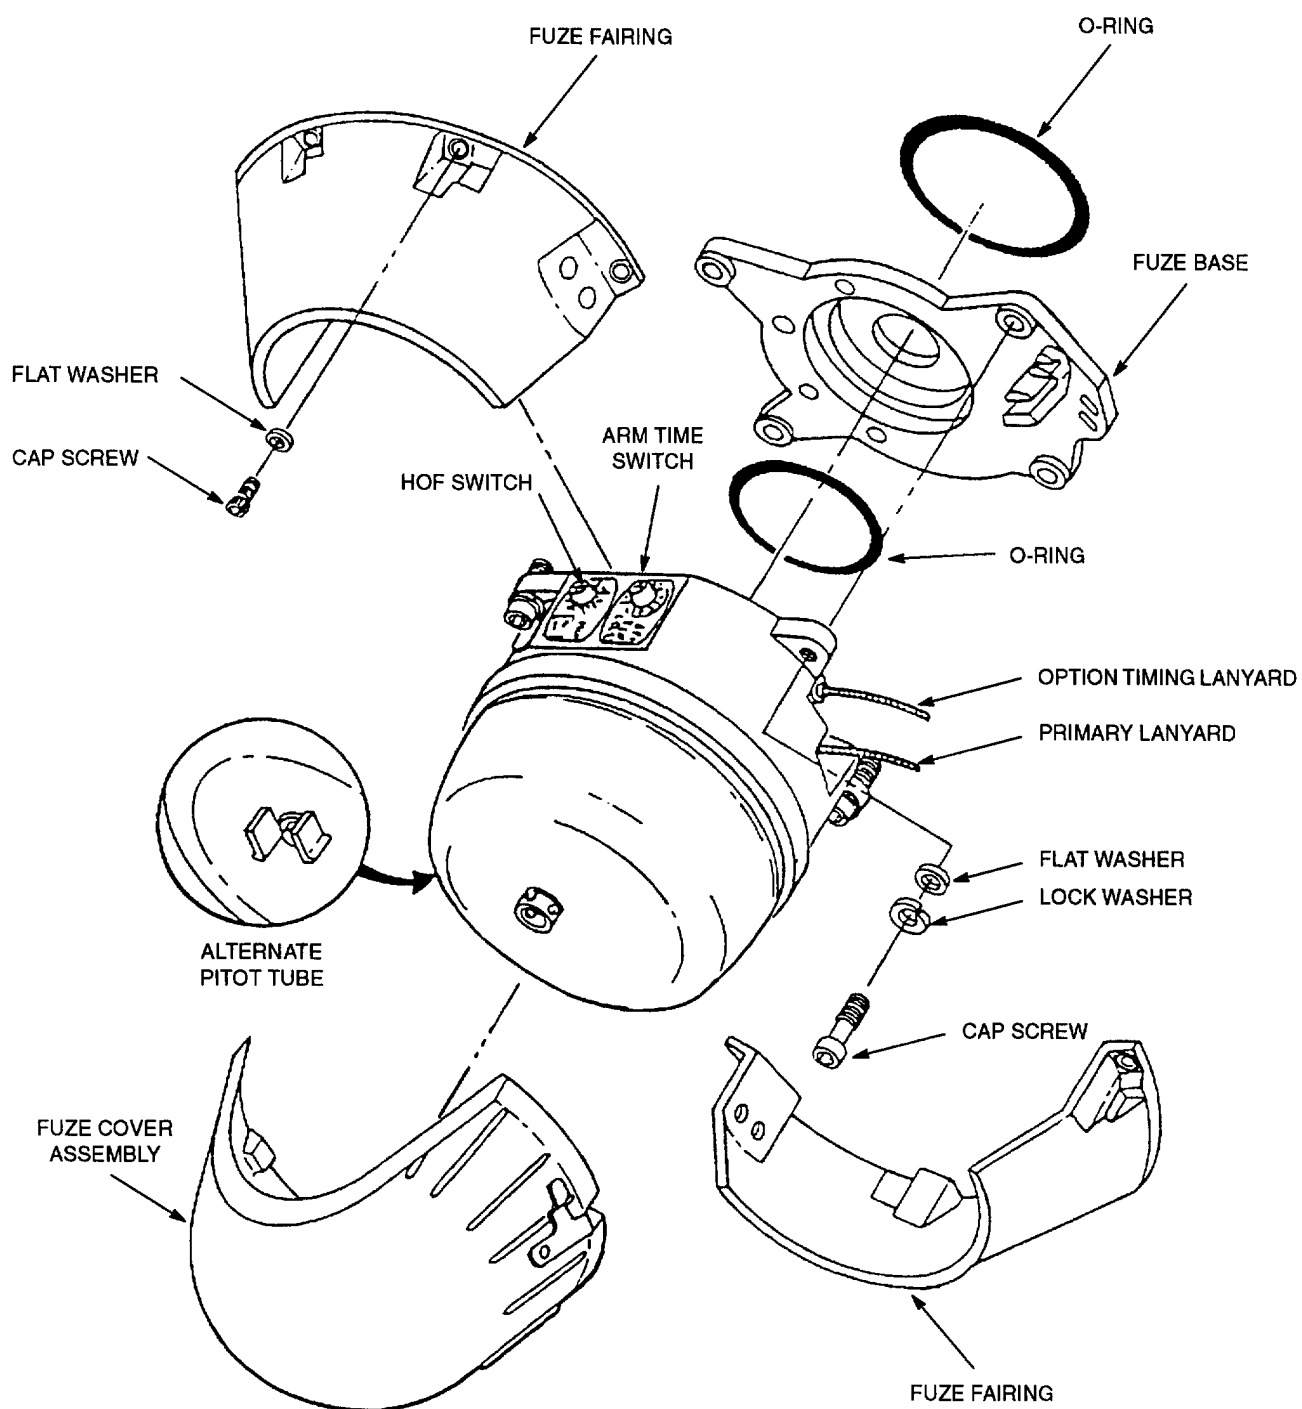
Fuze, Dispenser Proximity, FMU-140 Series - Exploded View
